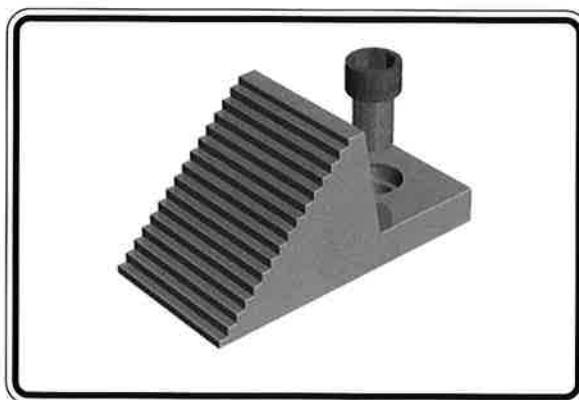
ALIGNMENT BLOCK AND BOLT
